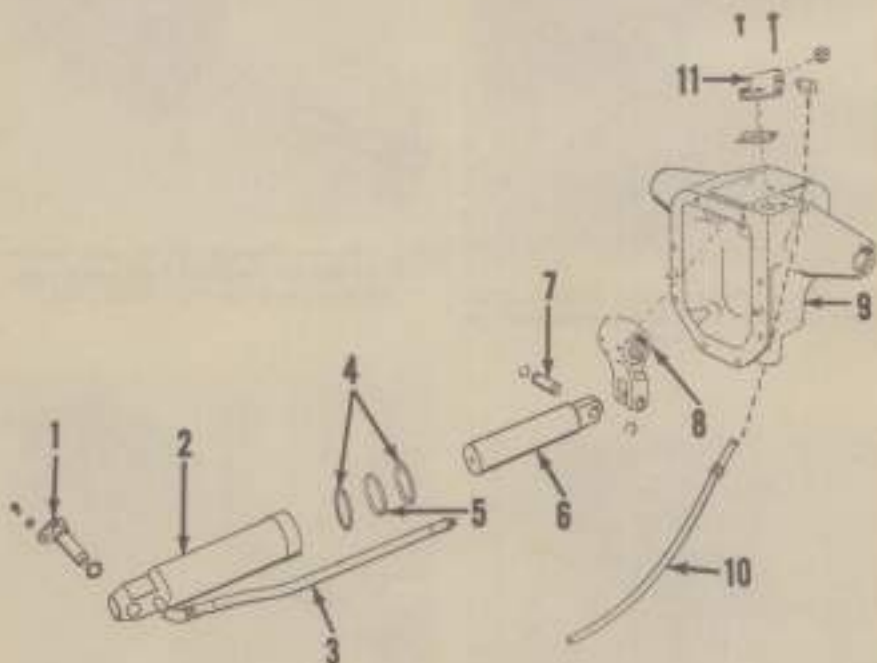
Exploded view of the lift (rockshaft) ram and associated parts for D-14 and D-15 tractors.
